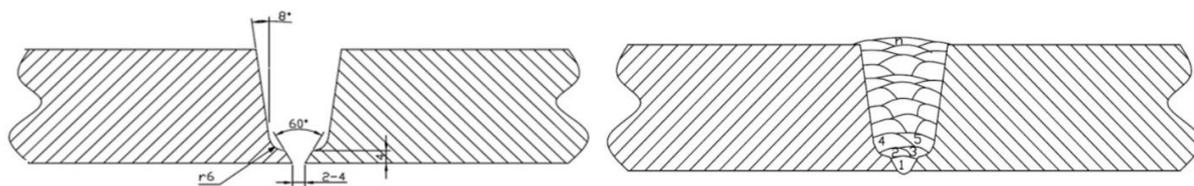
a) Welding groove geometry b) filling plan during welding procedure
